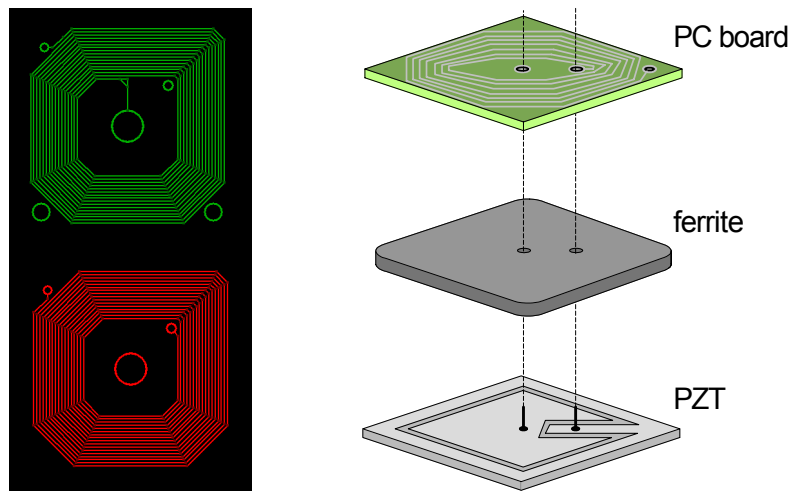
Planar coil transducer: (left) top and bottom metal layers of the printed circuit board; and (right) assembly of the three components.
